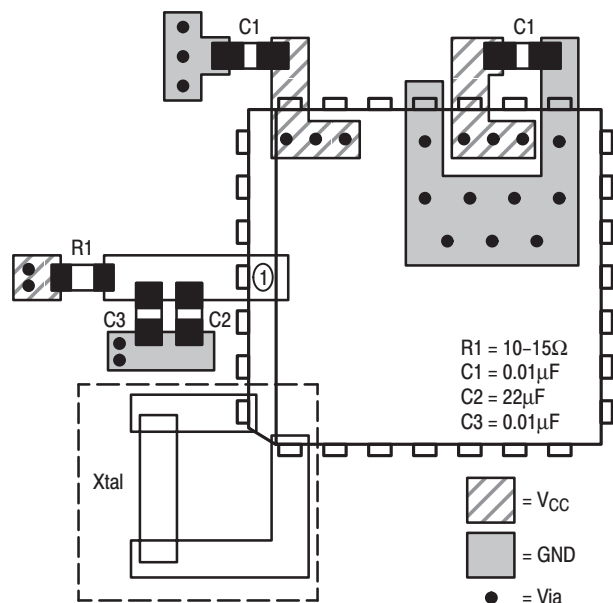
PCB Board Layout for MC12430 (28 PLCC)
